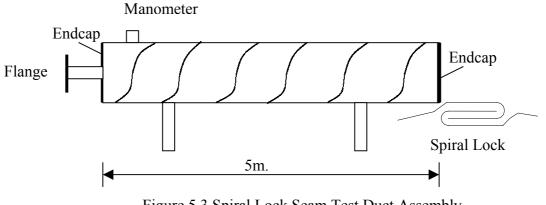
Spiral Lock Seam Test Duct Assembly
